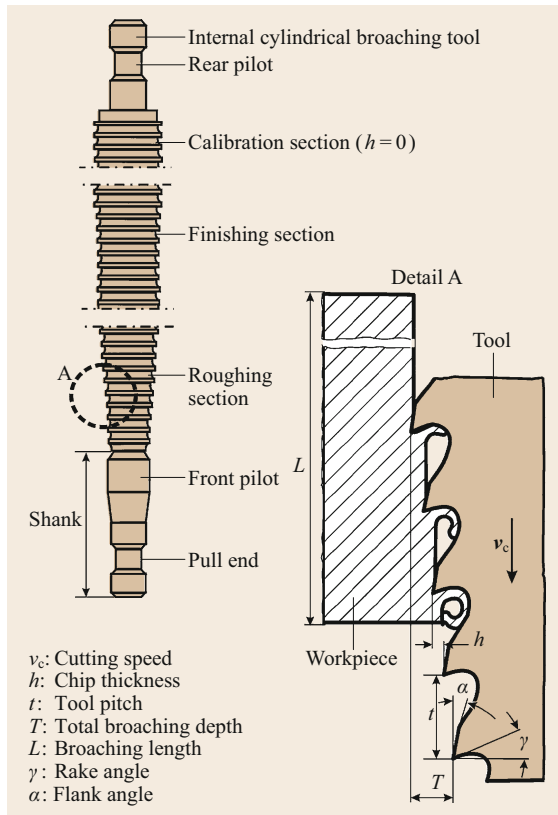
Internal cylindrical broaching tool and process characteristics
